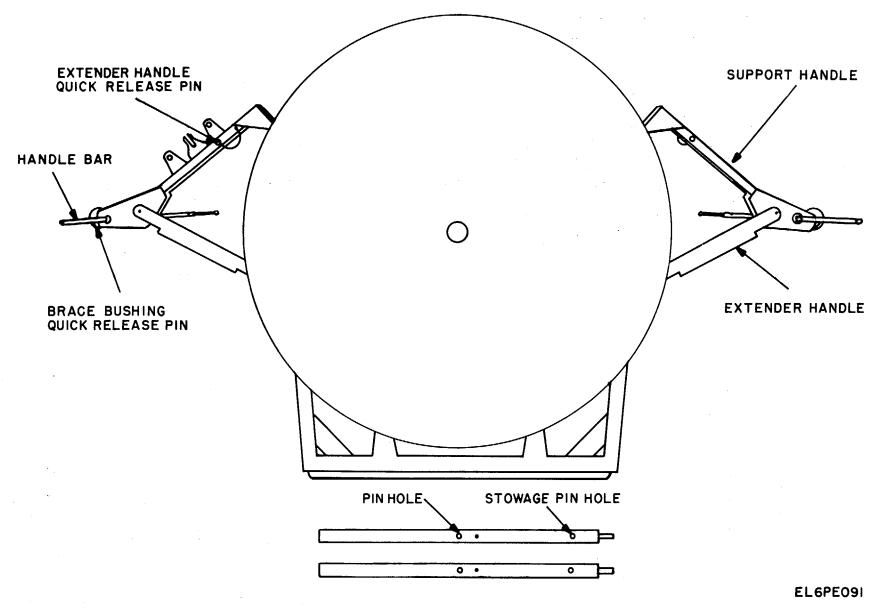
Antenna Center Section and Carriage Assembly, Unstowing and Lifting Items (Sheet 2 of 2).
